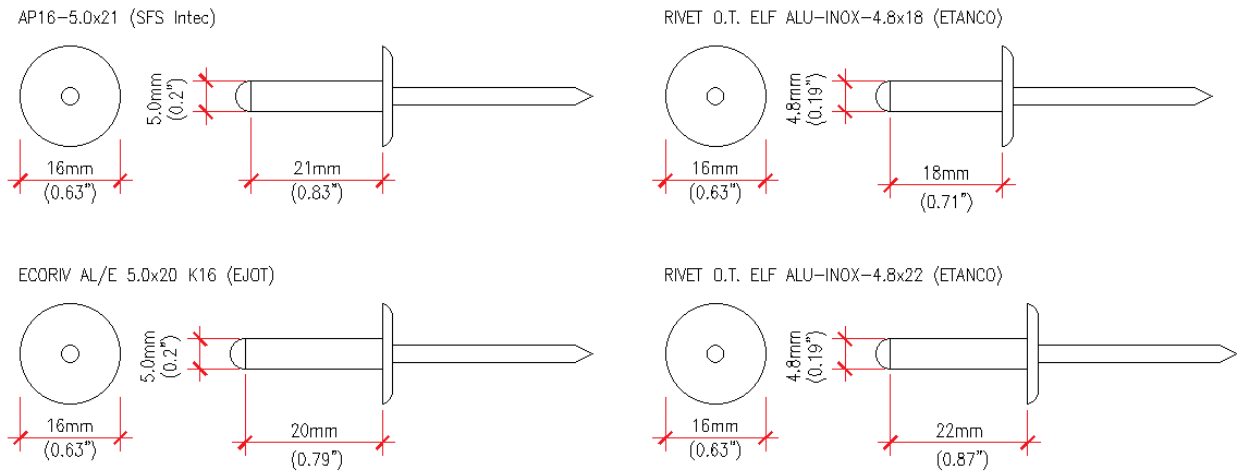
Rivets for fixing Viroc panels to a metal structure
